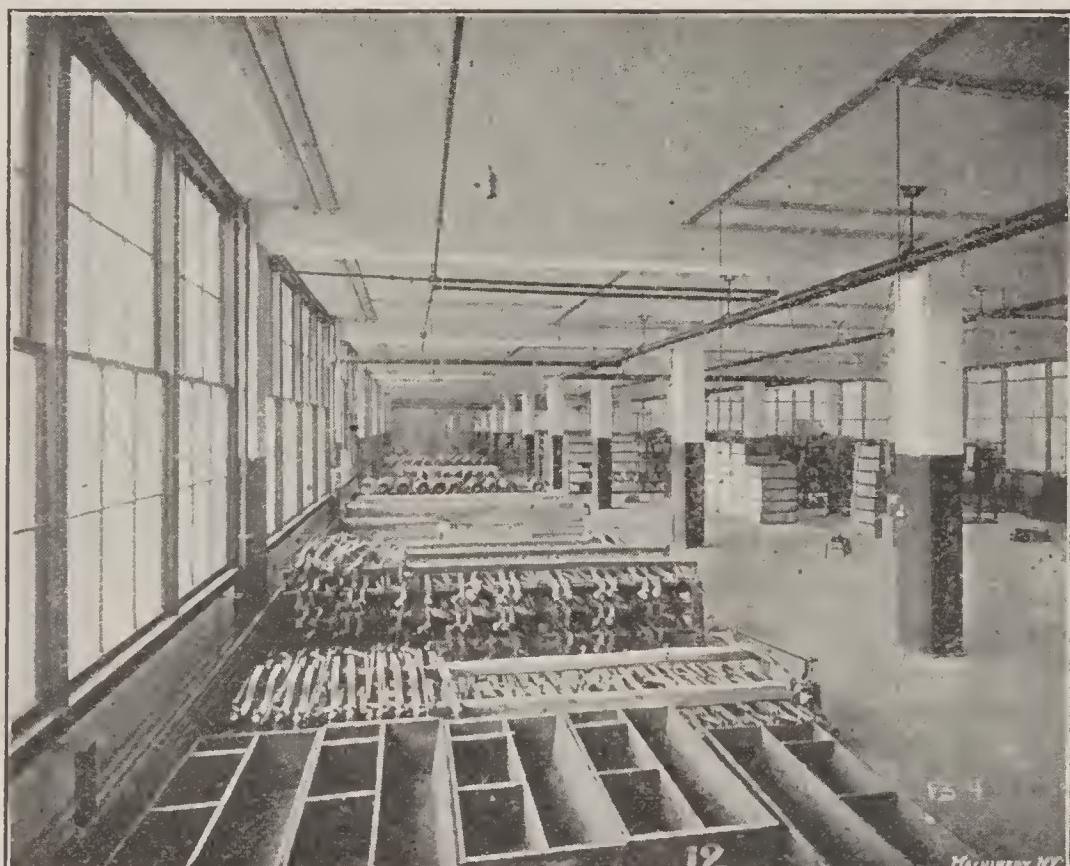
View of Stock Room, showing Trucks in which Parts are taken to the Assembling Room
